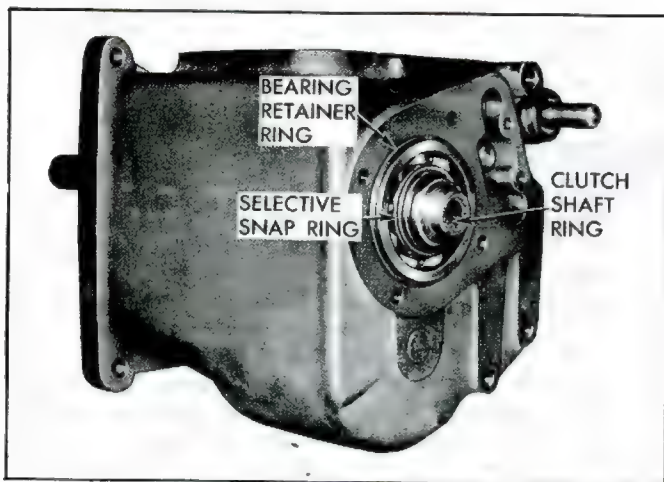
B-4—Clutch Gear and Bearing Snap Rings
